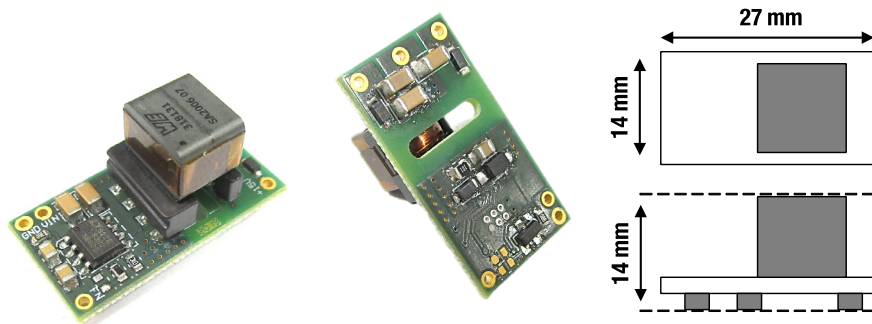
Board variant-A (a) top view (b) bottom view (c) dimensions
